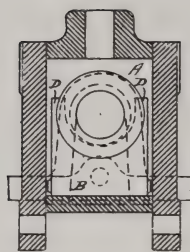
END VIEW OF VALVE CHEST OF FIG. 82.
